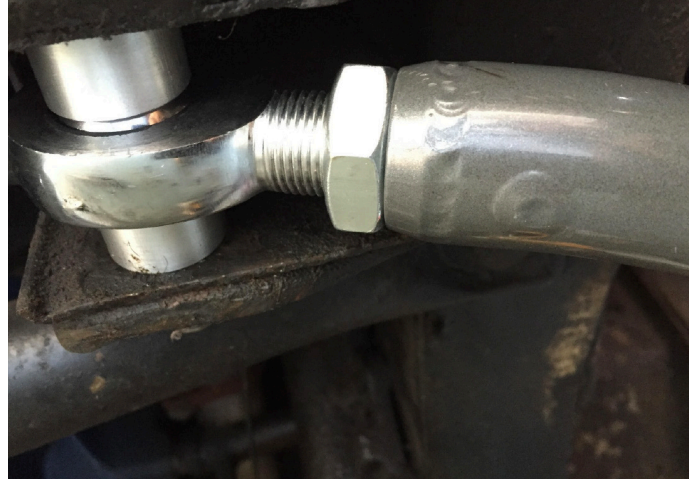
A view of the lower control arm bolted to the chassis, sandwiched between the aluminum spacers within the bracket.
